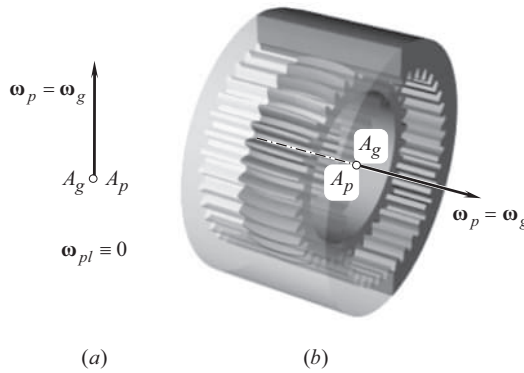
Gear vector diagram for gear coupling (a), and gear coupling: closeup (b).
